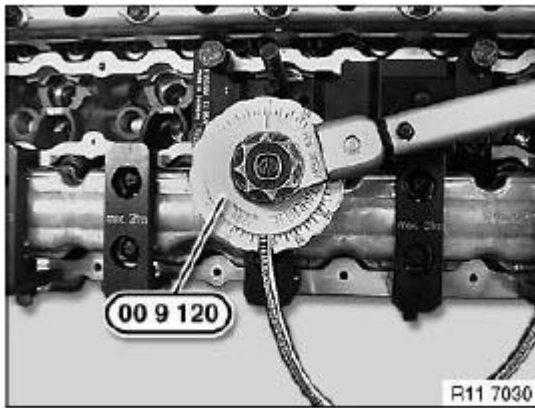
Tightening Lower And Upper Bearing Banks With Special Tool 00 9 120
